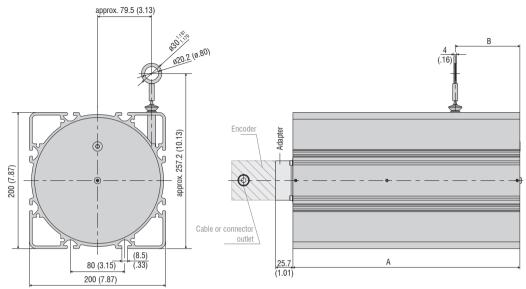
Dimensional drawing WDS- ... - P200 - XX - XXX, dimensions in mm (inches, rounded-off)
